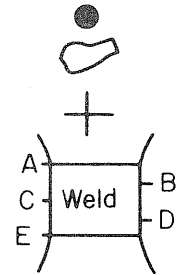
FRACTURE SURFACE, AND ULTRASONIC INDICATIONS RECORDED FOR SPECIMEN ND-18
